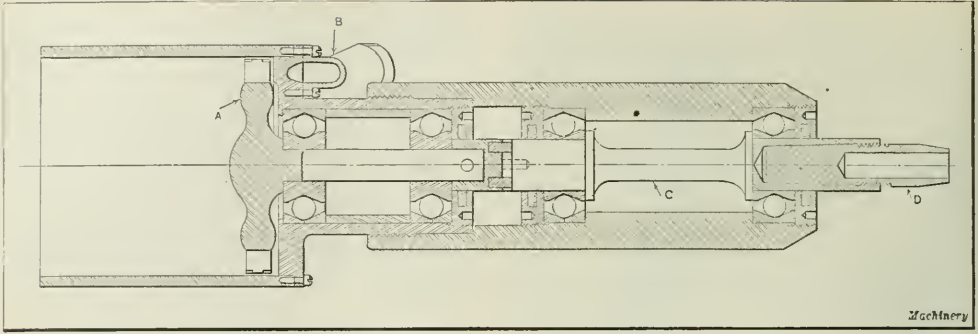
Air-driven High-speed Grinding Spindle made by the Ex-Cell-O Tool & Mfg. Co.
